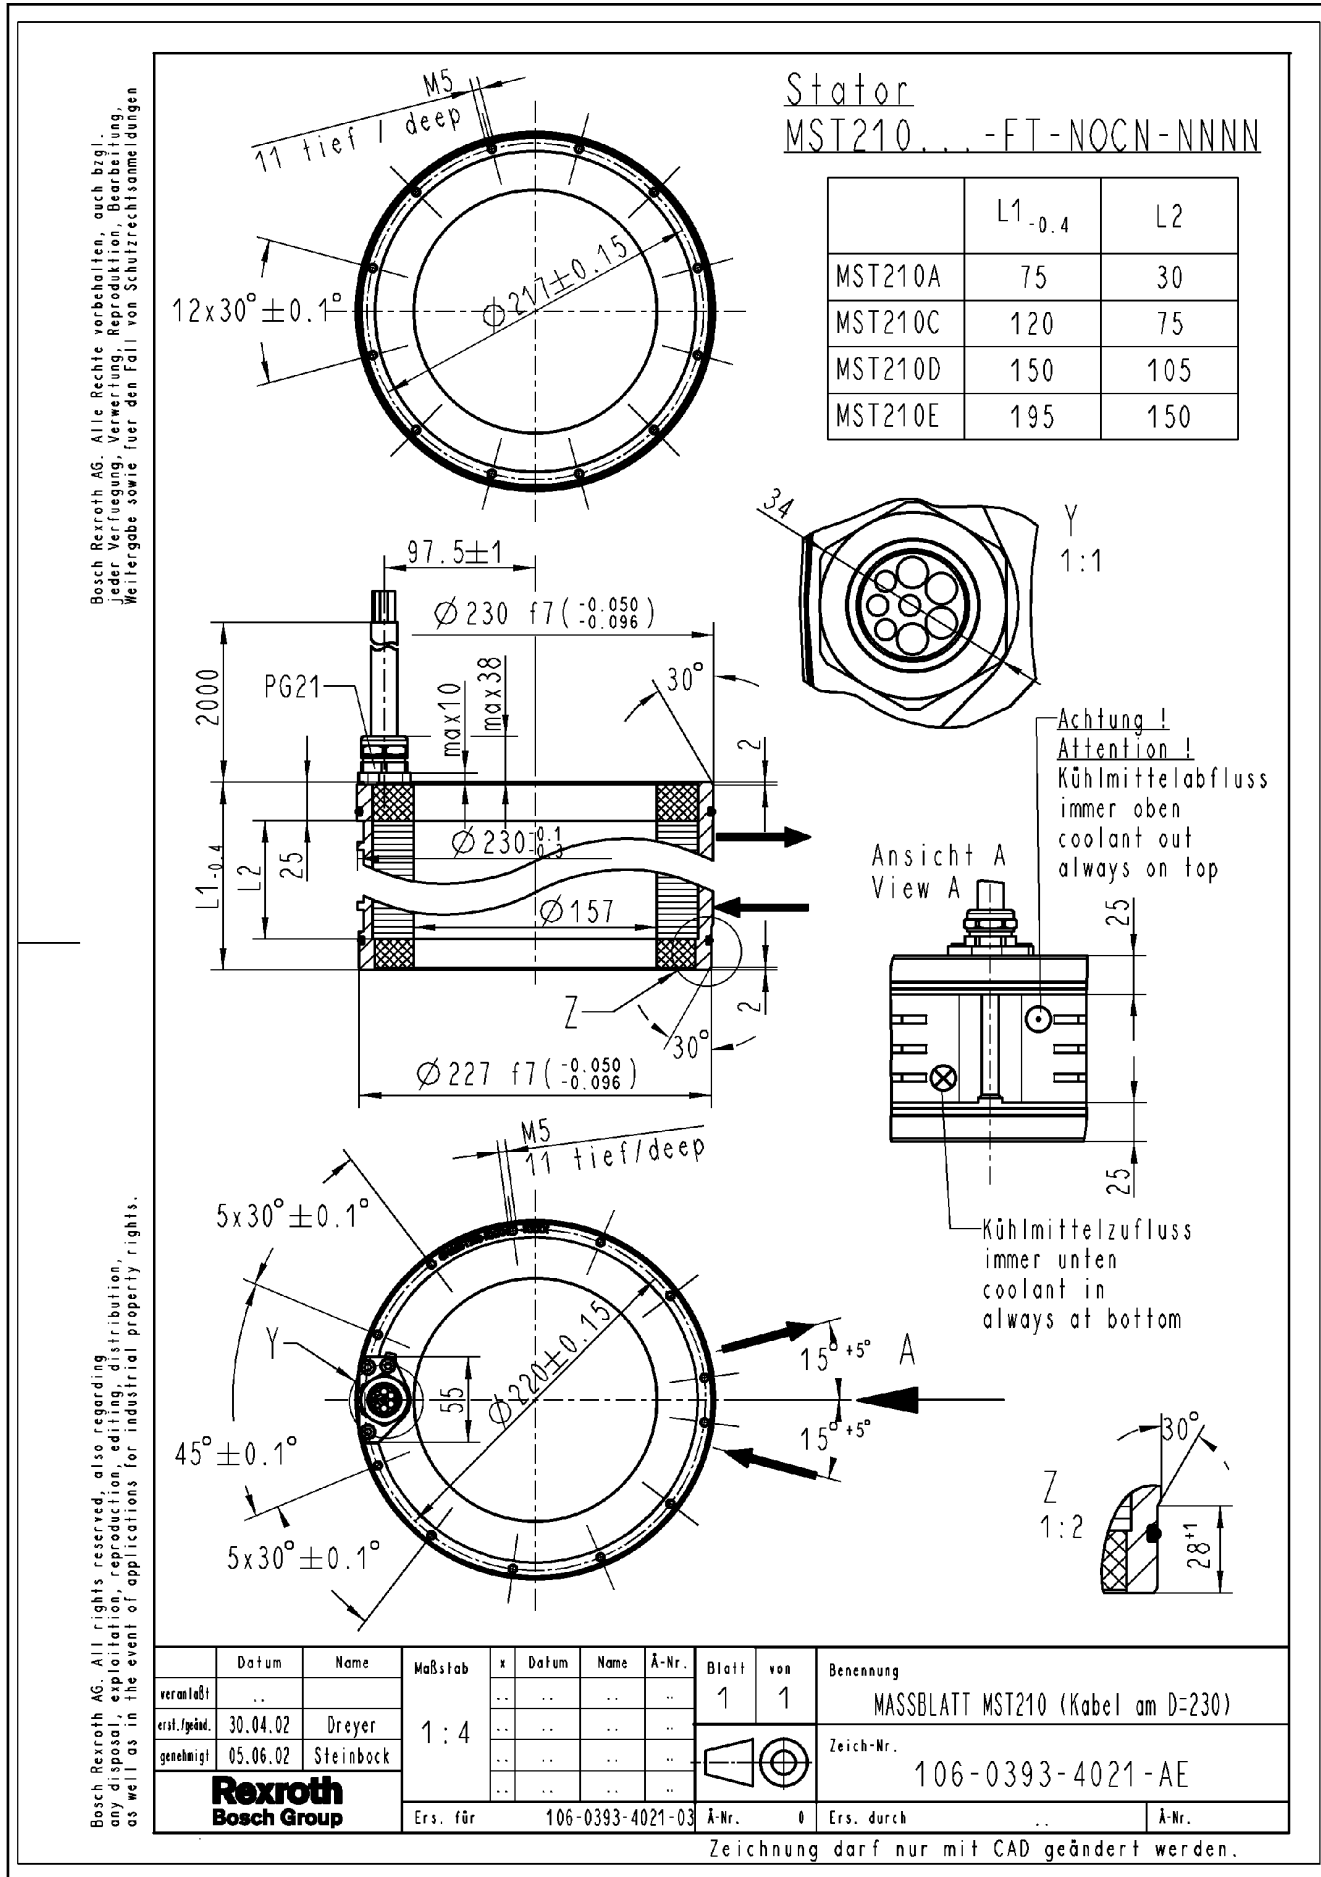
Dimension sheet MST210, electrical connection "CN"
